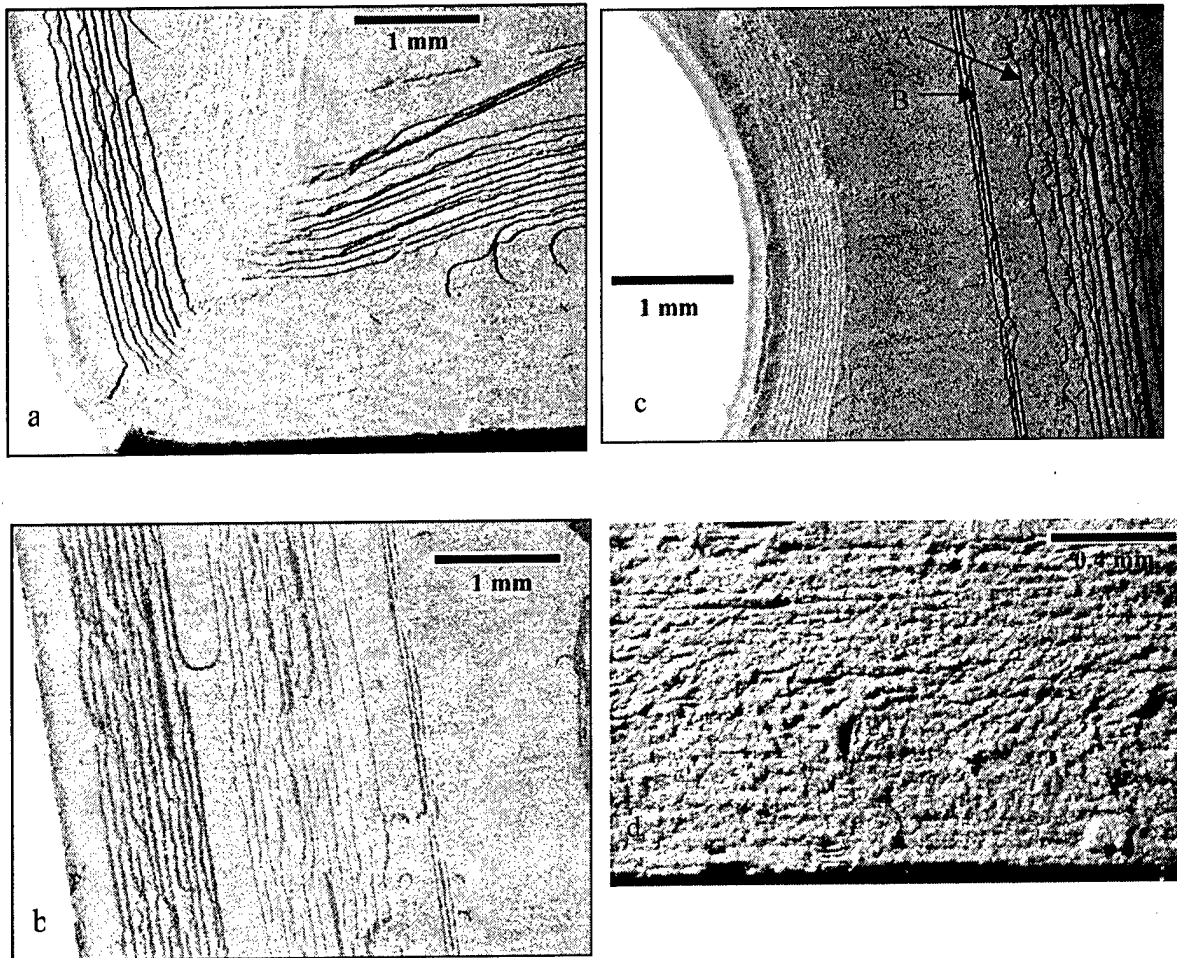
(a-c). Images of printed CNMG style insert. a) 110° corner. b) edge, chip breaking groove top land. c) through-hole with counter sink, top land and slope back to chip breaker. d) edge (side view), slurry rastering direction is out of the page.
